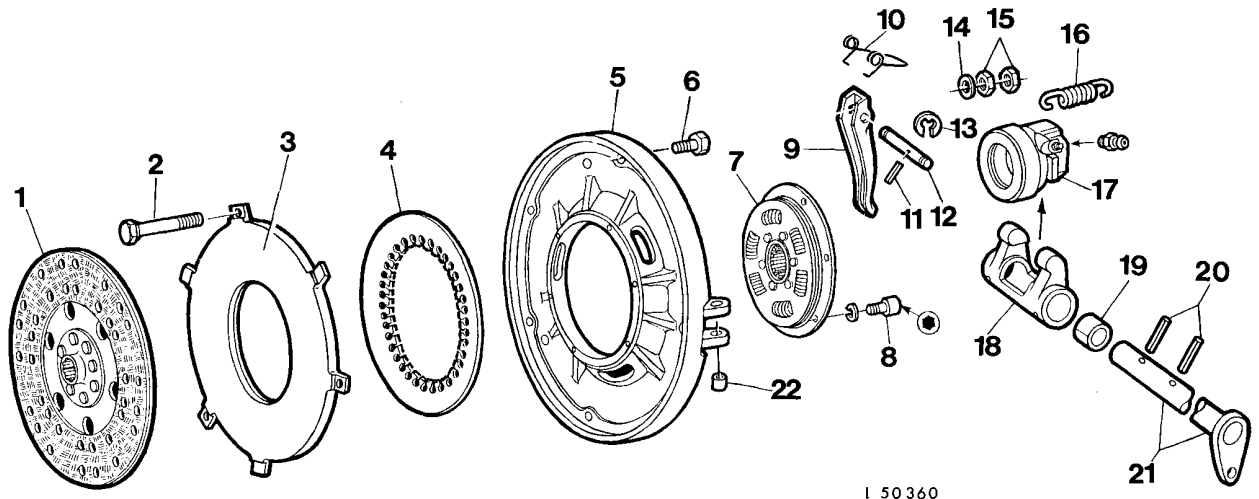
Engine Single-Stage Clutch, Exploded View
